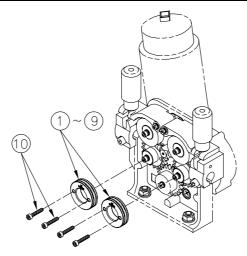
Exploded diagram of feeding roll (L7810G)
